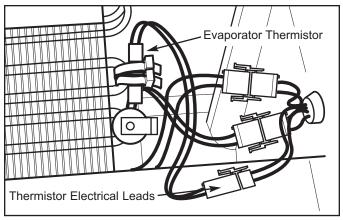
700BCI-3 & 700BFI-3 Evaporator Thermistor
